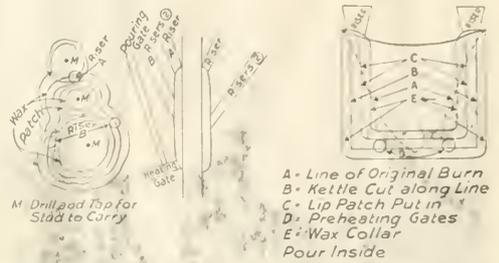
PLAN AND SECTION WITH PATCHES AND RISERS. FIG. 3. SKETCH SHOWING A LIP PATCH
